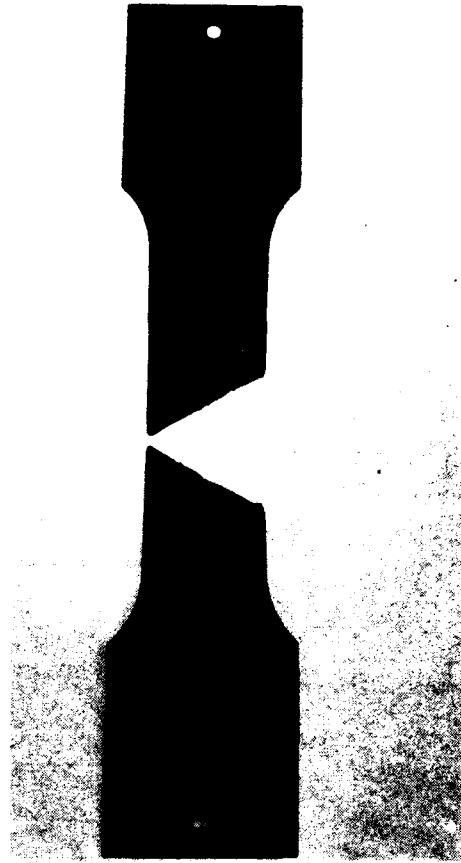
Microhole Sample: Top is Front Side, Bottom is Reverse Side.
